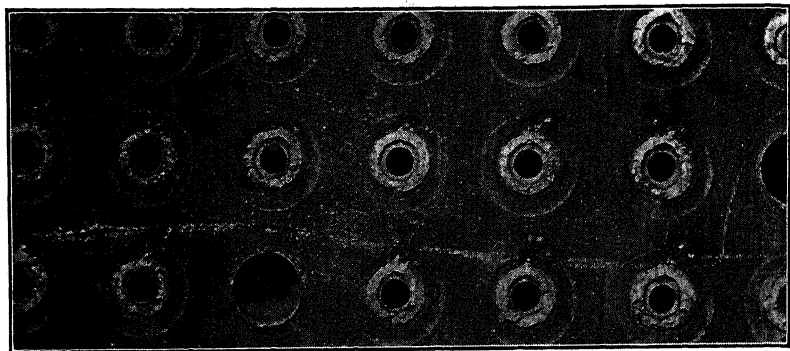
Method of renewing locomotive staybolt holes by welding in tapered bushings.
